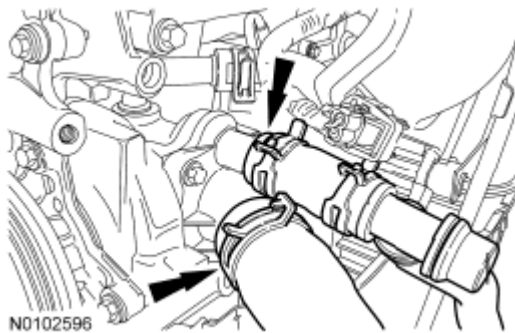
Locating Oil Cooler Hose And Lower Radiator Hose From Thermostat Housing
